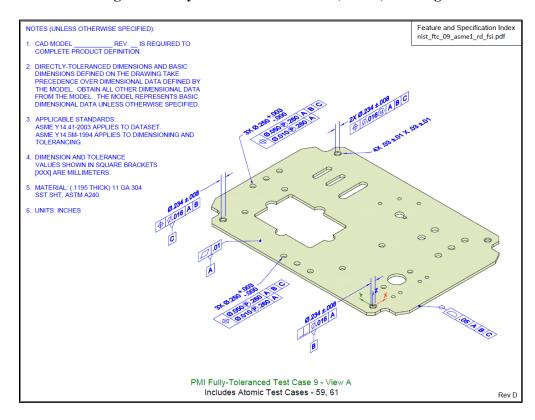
Fully-toleranced test case 9 (FTC 9) drawing
